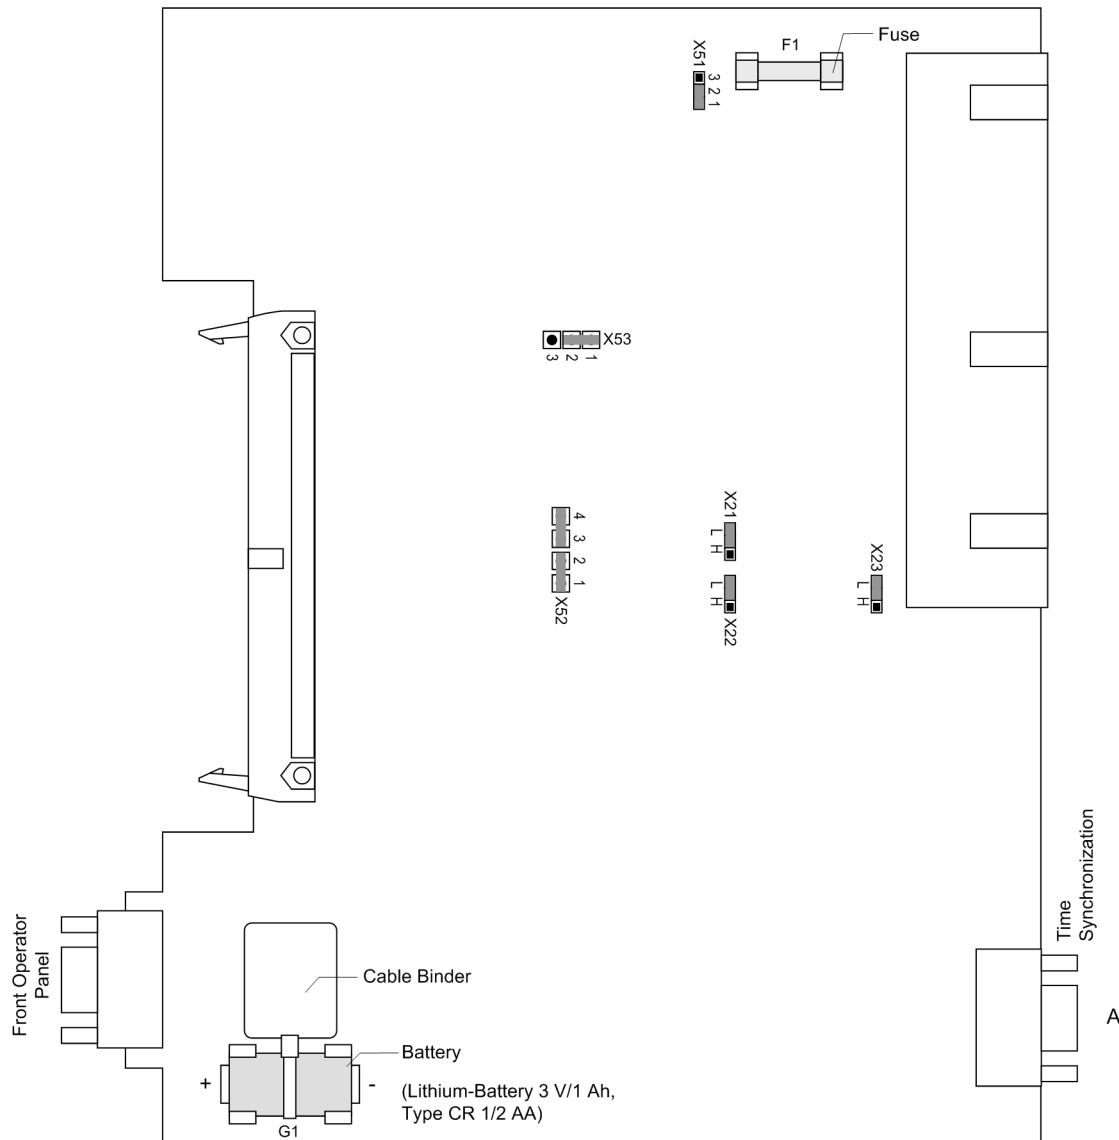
Processor printed circuit board A-CPU for devices up to release .../DD with jumpers settings required for the board configuration
